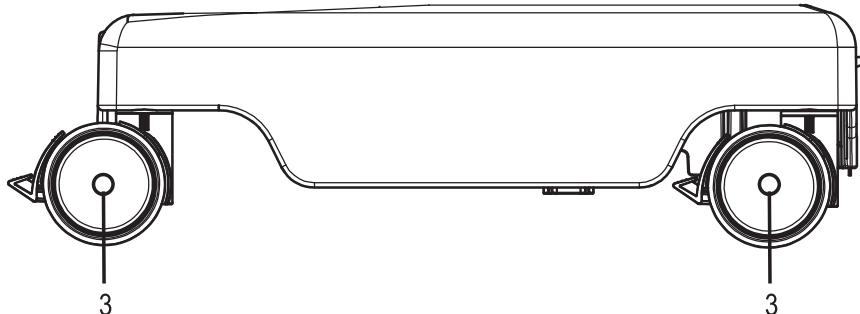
Base Platform, 4 Swivel Caster with Brake, Side View
